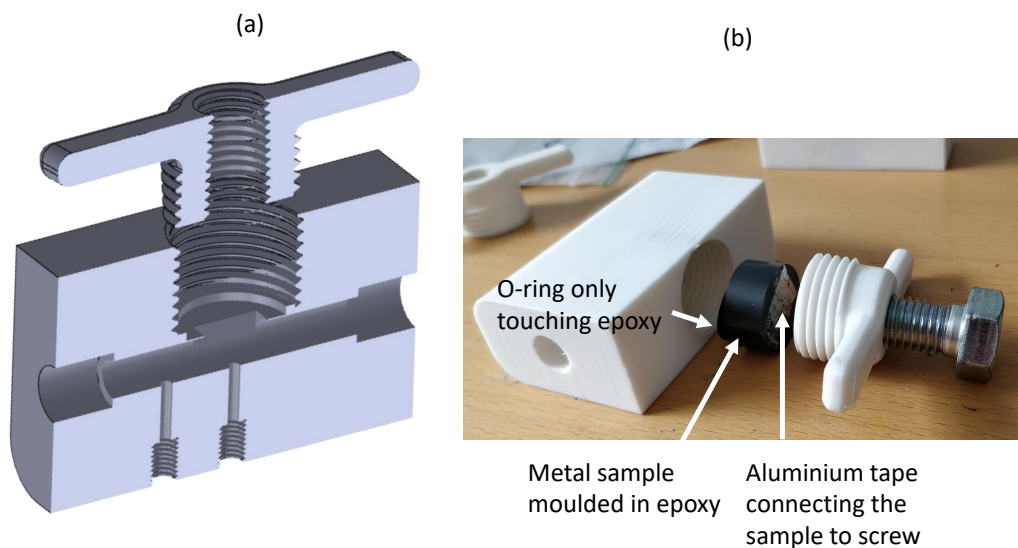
Model of a new test holder. (a) is the CAD drawing and (b) is the 3D-printed model showcasing the O-ring, the sample moulded inside epoxy with aluminium tape attached to it and the metal screw connecting the sample.
